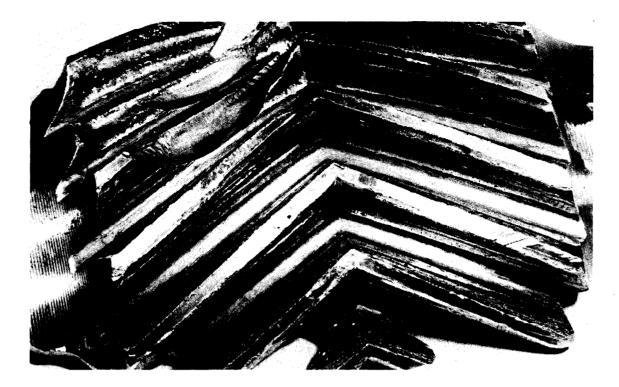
Pinion tooth pitting and breakage from torque overload applied inside apex.
